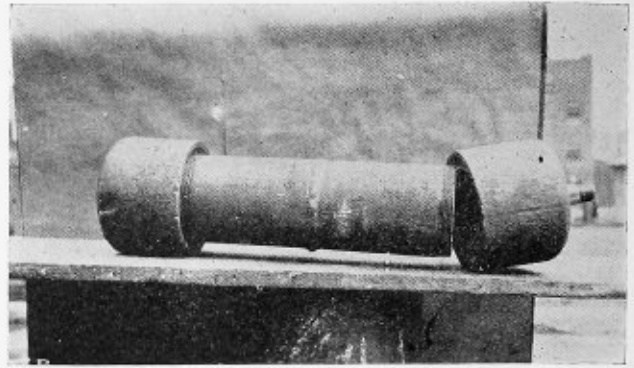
4-Inch Pipe with Screwed Caps which Tore Away at Threads Under a Pressure of 4,200 Pounds, the Weld Holding
